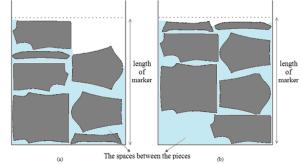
Both packing by the same length and: a) less spaces between the pieces. b) More spaces between the pieces.
